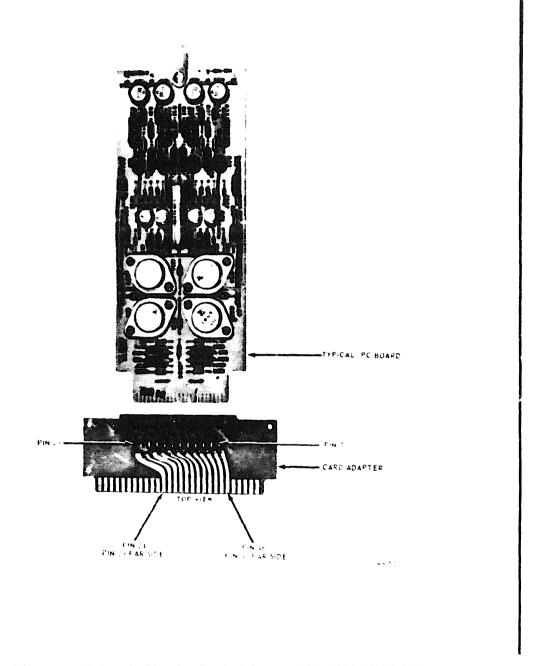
Printed Circuit Card Adapter MX-9089/USM-371 (23 Pin Anelex)
